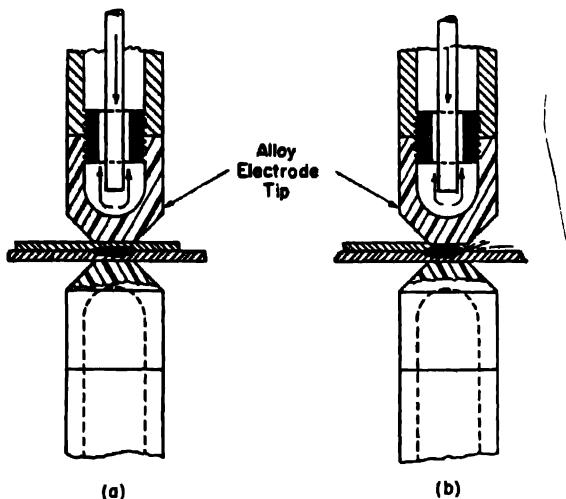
Typical assembly for spot welding, showing two workpieces and two electrodes. (a) Correct assembly; soft metal is confined. (b) Wrong; electrode is too near edge of one piece.
